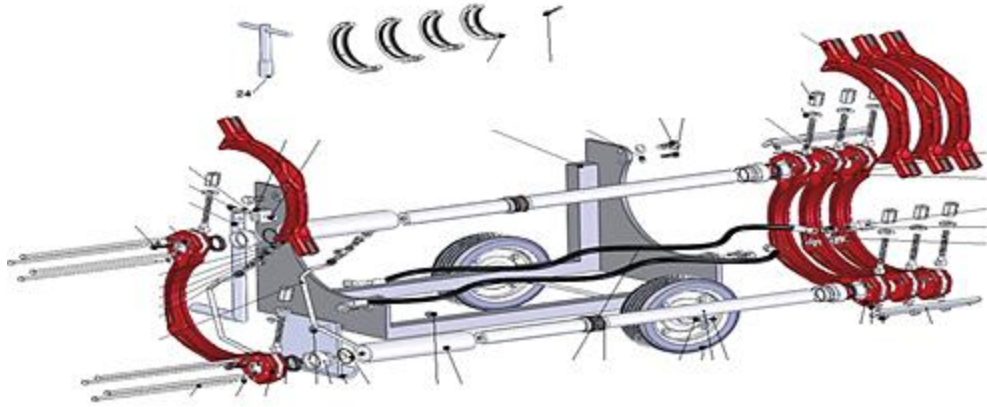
The machine body, clamps, and hydraulic pistons design
